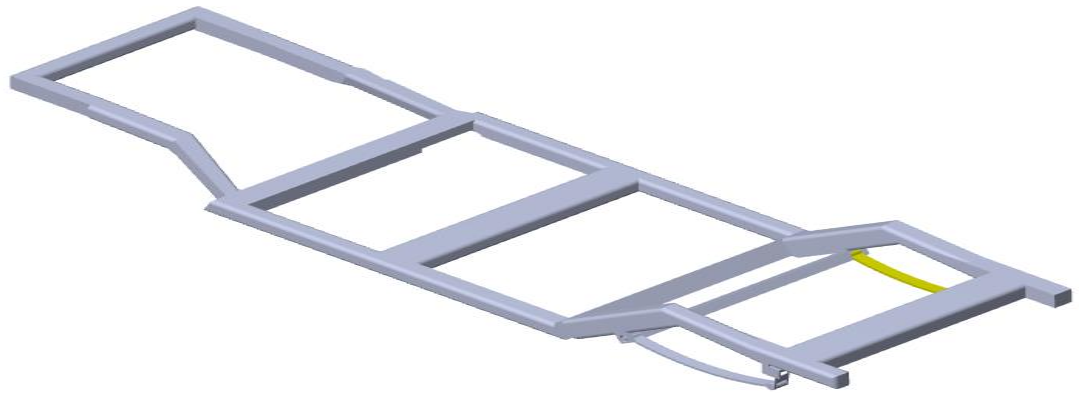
14: Chassis assembly of composite materials leaf spring using solid work 2013
